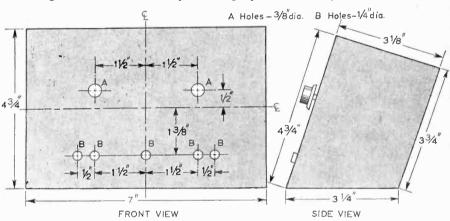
Dimensions of the cabinet and drilling details of the front panel.
